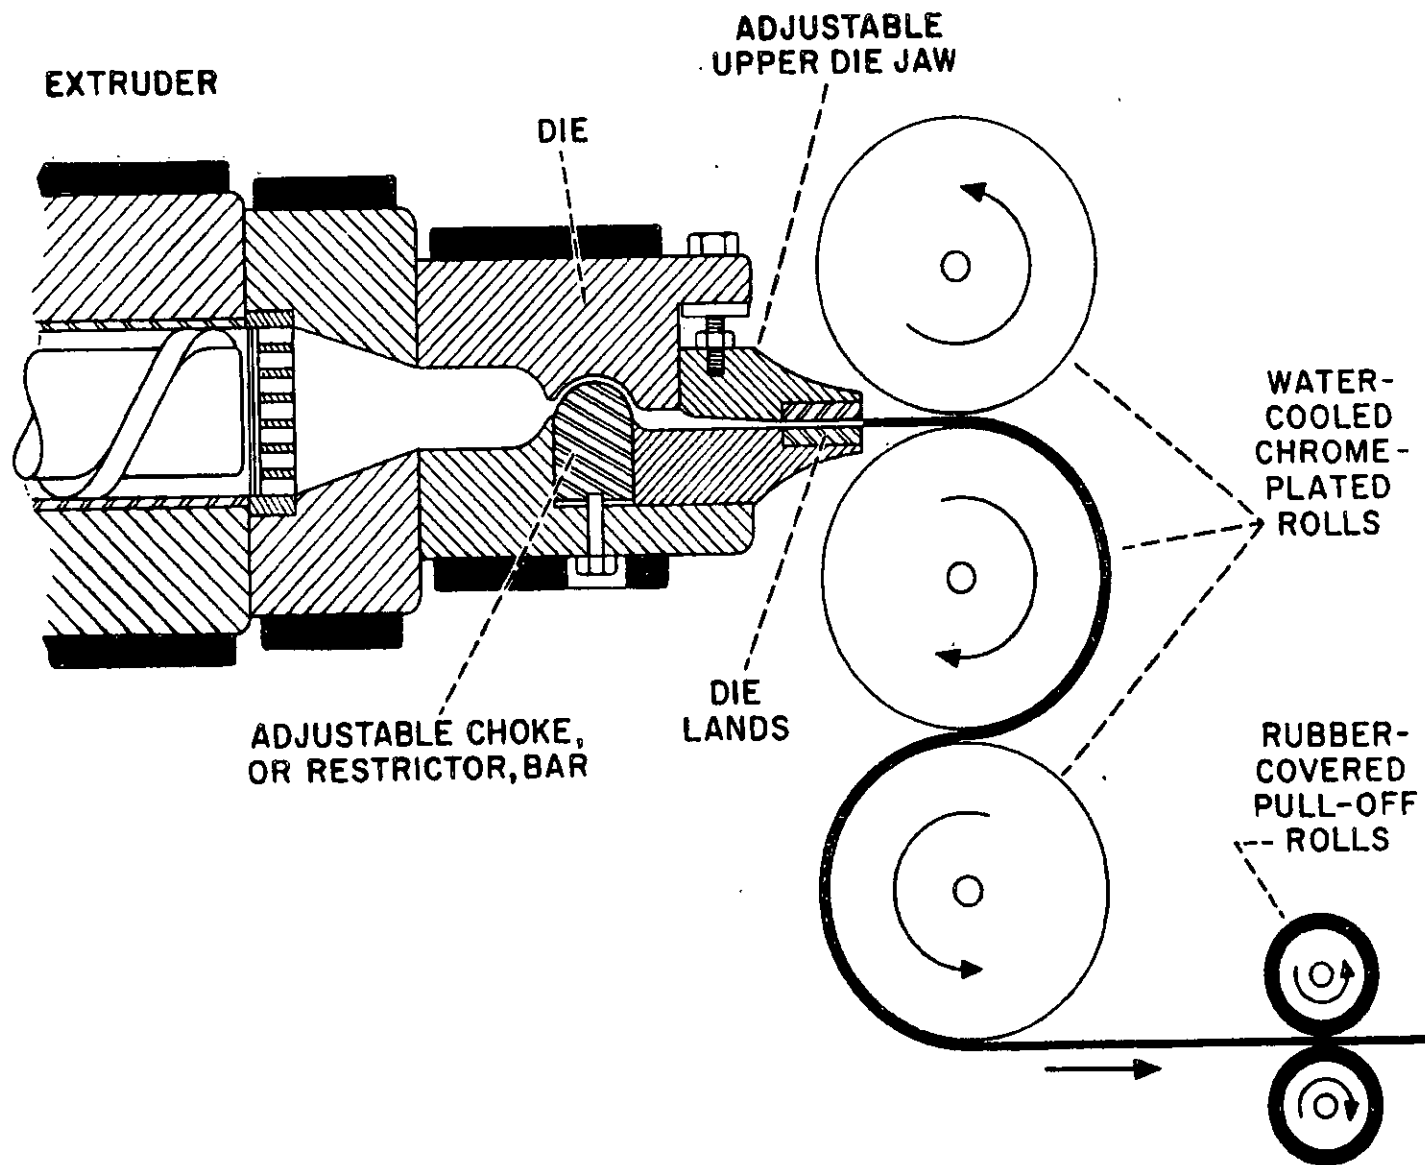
Cross section of a sheeting die and take-off unit for sheeting.
